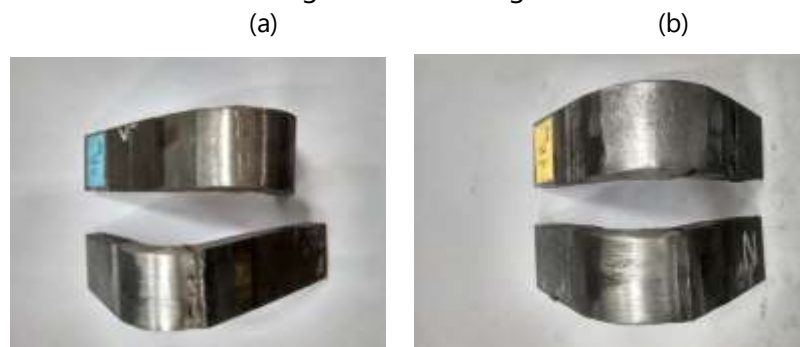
(a) Specimen with three layers weldment, (b) Specimen with four layers weldment
